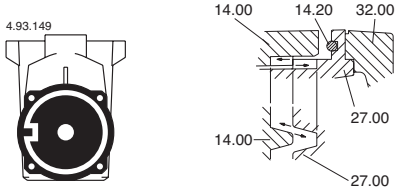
Locating lug/slot for assembling pump casing (14.00) - diffuser cover (27.00).
